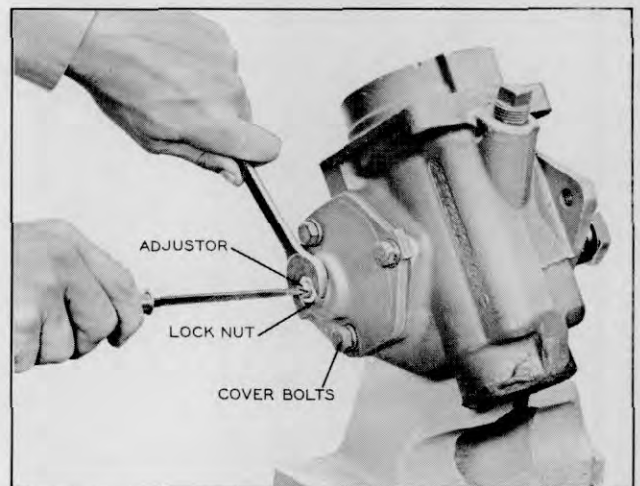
Steering Gear Lash Adjustment (Sector Gear)
